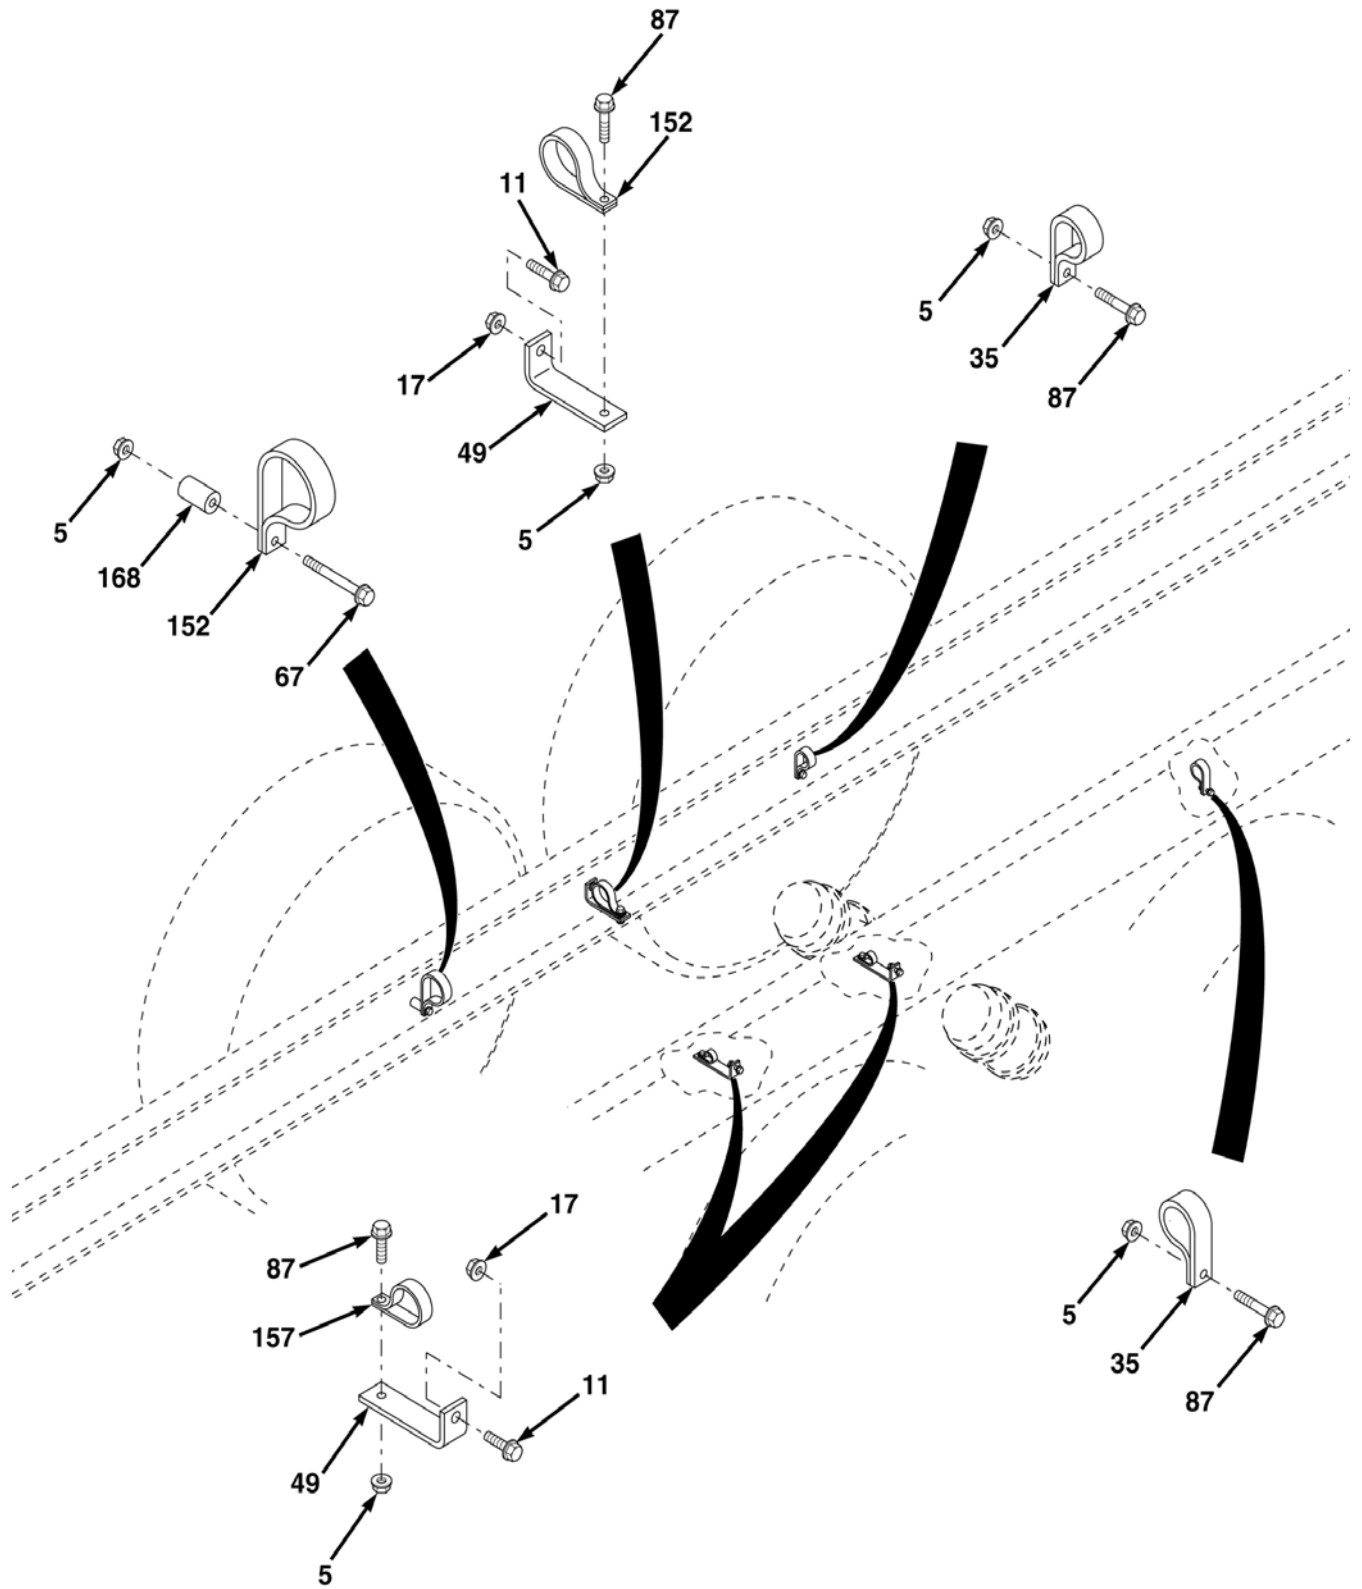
CHASSIS AIR (SHEET 14 OF 15)
